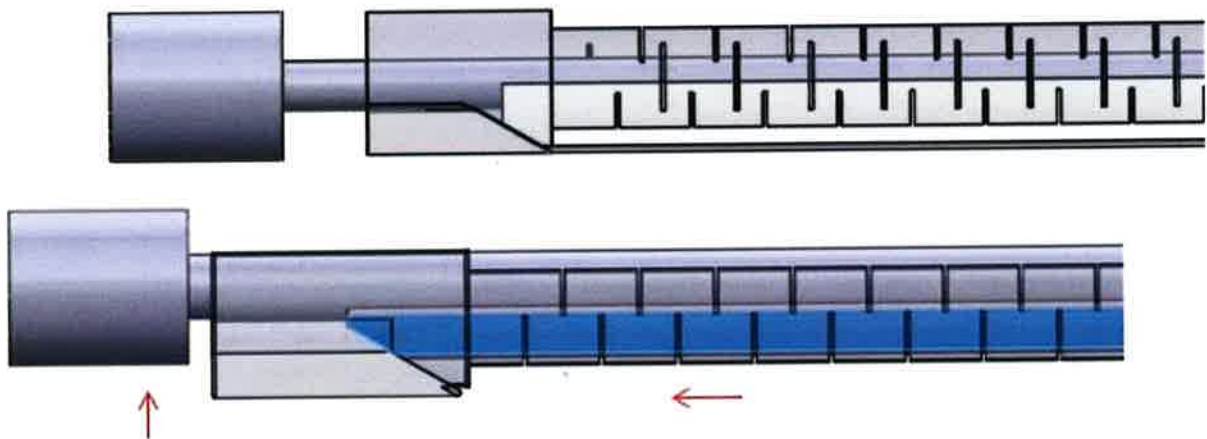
As the trigger is contracted towards the handle, the plunger is advanced up the saddle ramp. This causes the reamer shaft to be translated in one direction instead of deflecting the reamer head at an angle as in previous designs.
